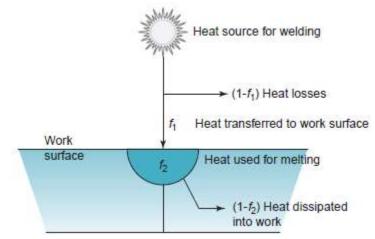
Heat transfer mechanisms in fusion welding.
